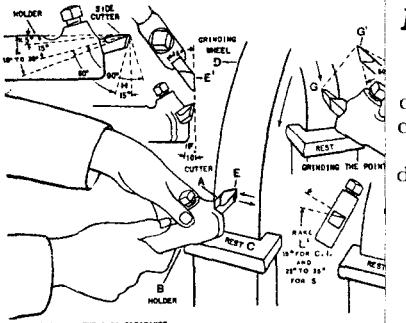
GRINDING A SIDE TOOL CUTTER IN HOLDER.
